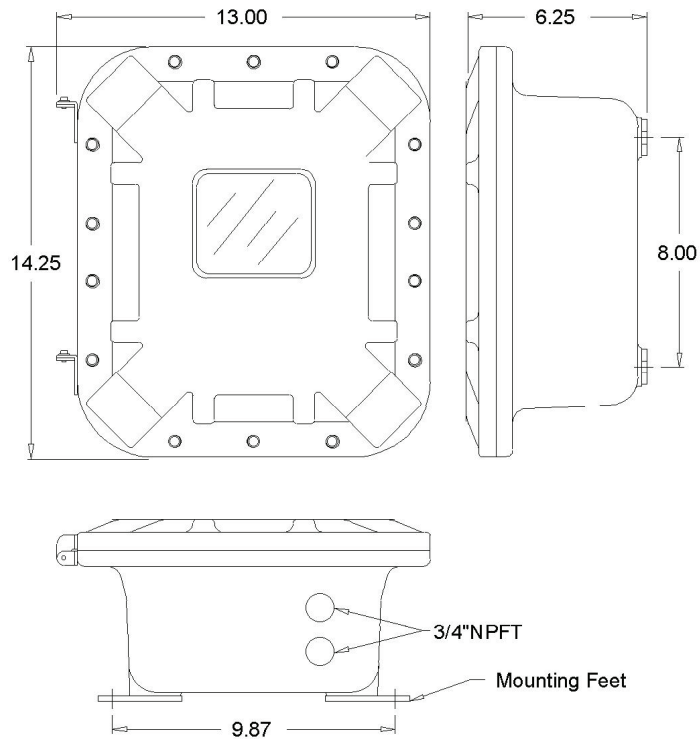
NEMA 7 Explosion-Proof Wall Mount Enclosure
